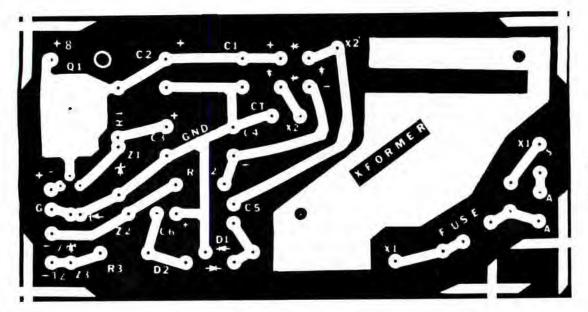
Full-size etching and drilling guide for power supply pc board.
